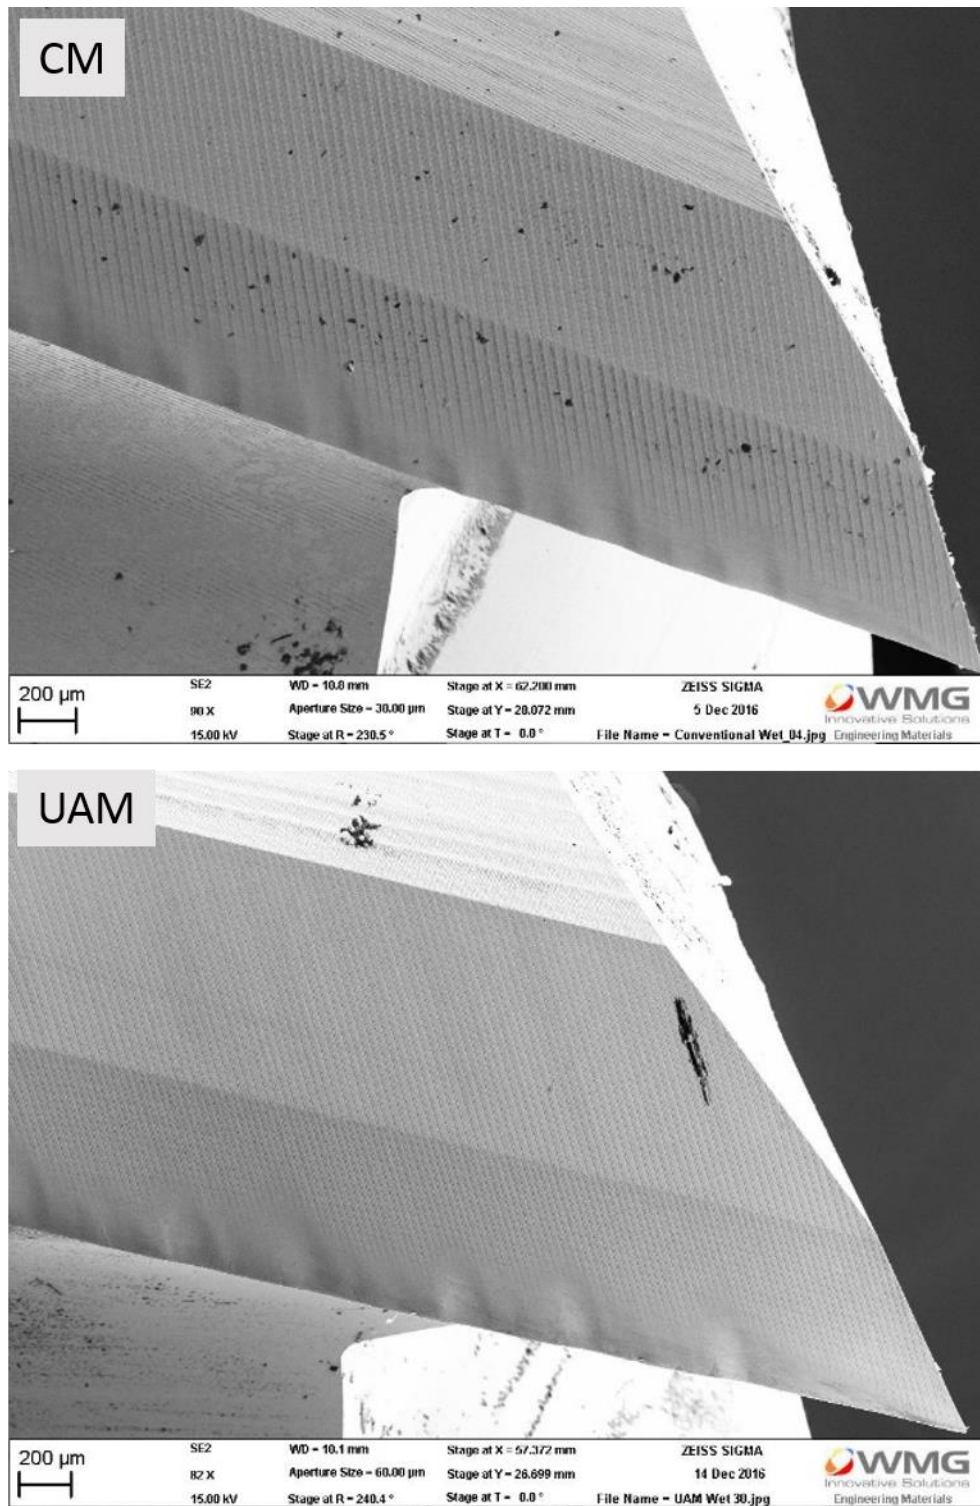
SEM micrographs of tungsten carbide end mill for (a) CM and (b) UAM in CCF environment after 3000 mm machining length.
